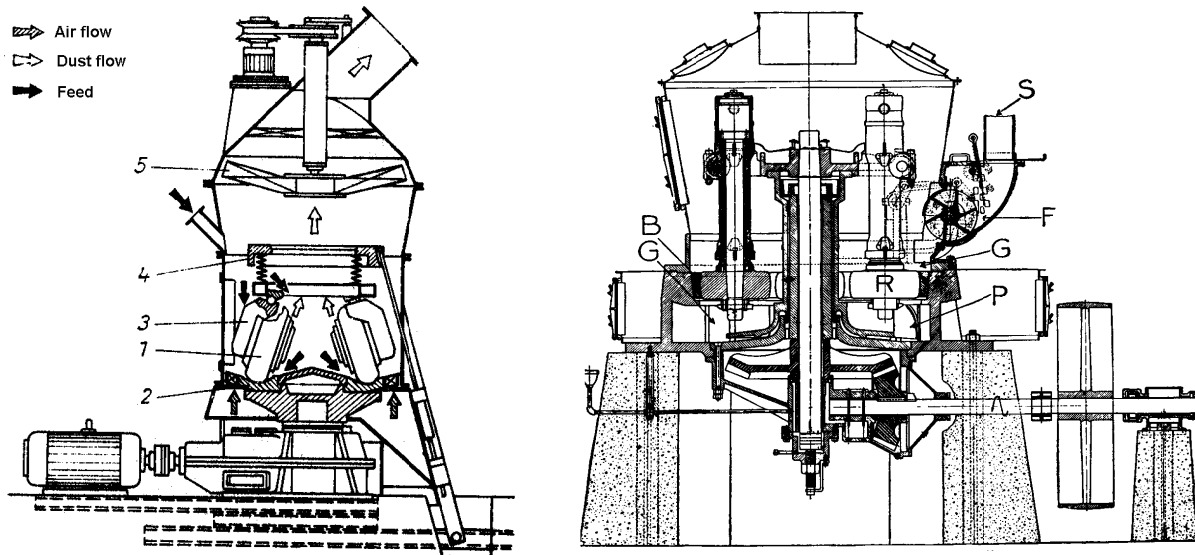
Dry pan mill with integrated air classification (left) and Raymond dry centrifugal roller mill (right) [Schubert Vol. I / Source unknown].
